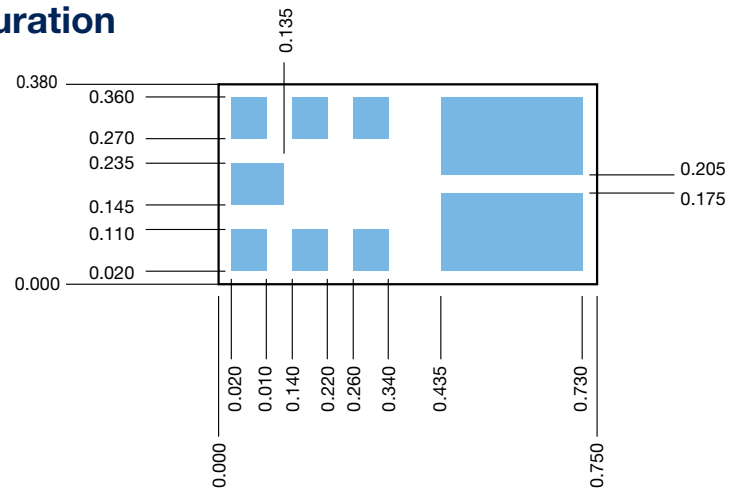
Recommended PCB Solder Pad Configuration (Bottom View)
